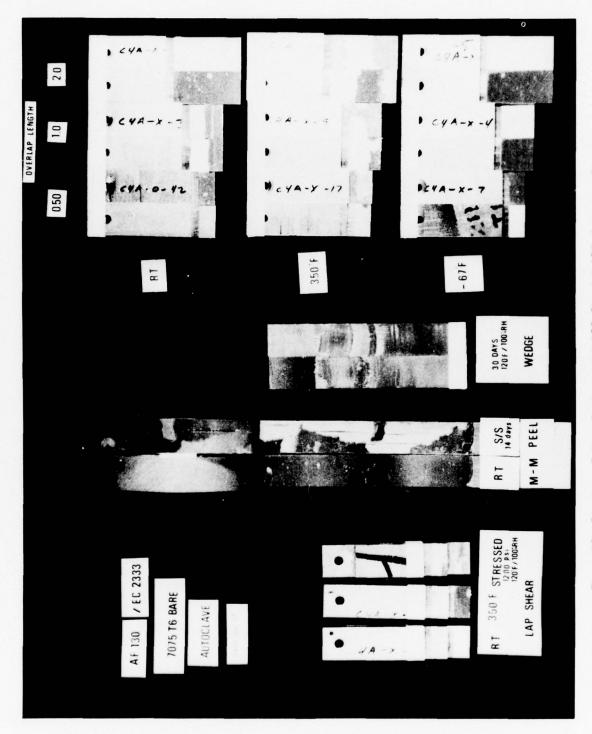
Specimen Failure Surfaces—AF 130, PasaJell 105, Autoclave Bonds
